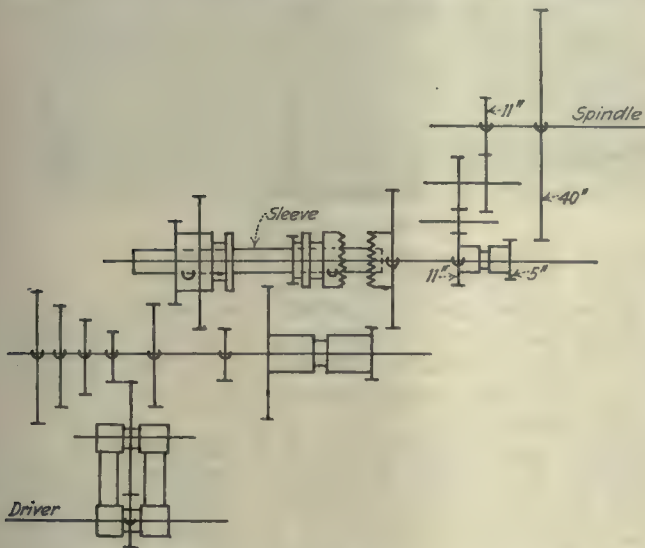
ANOTHER MODIFICATION OF LATHE DRIVE
